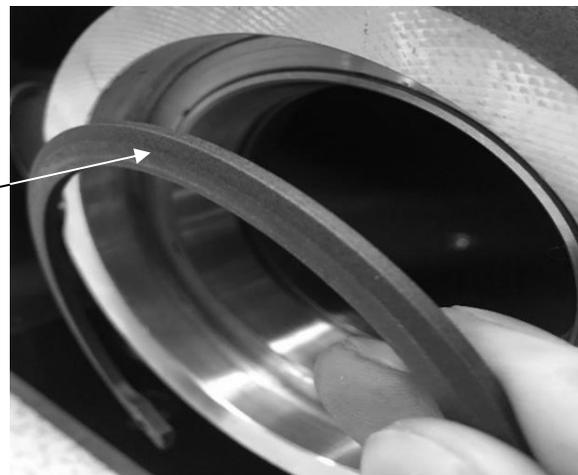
| BEVELED RETAINING RING WITH BEVEL FACING OUTWARD
